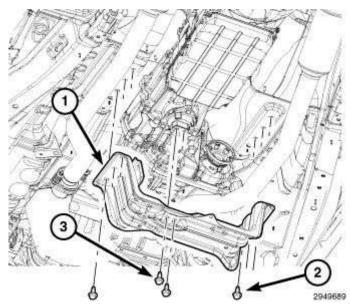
Crossmember, Crossmember Bolts & Transmission Mount Bolts
